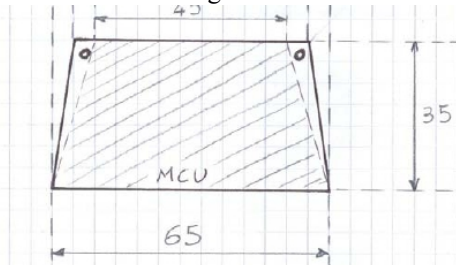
Dimensions of 6-layer PCB of the SMILING MCU
